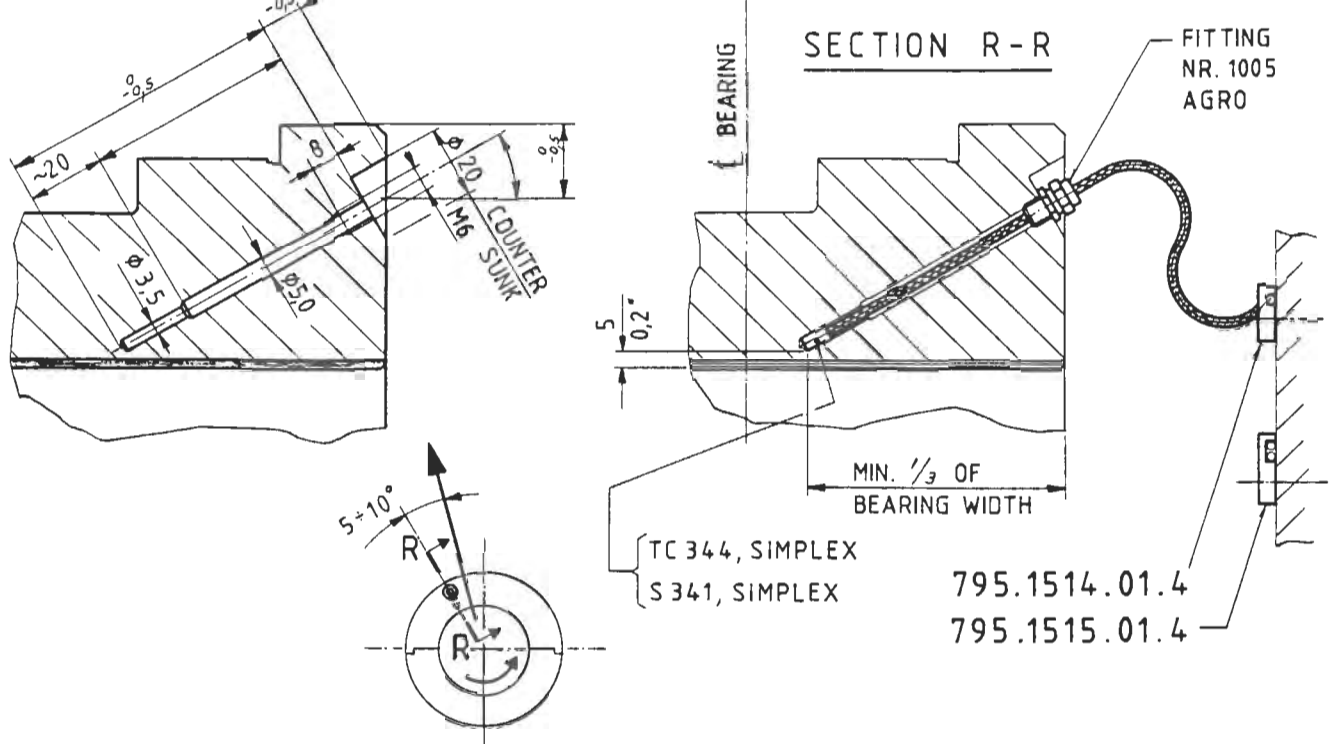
Technical details of embedded type TC and RTD's in radial bearings
